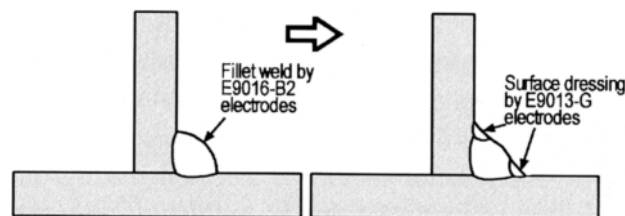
Surface dressing with E9013-G electrodes on an E9016-B2 fillet weld to improve fatigue strength
